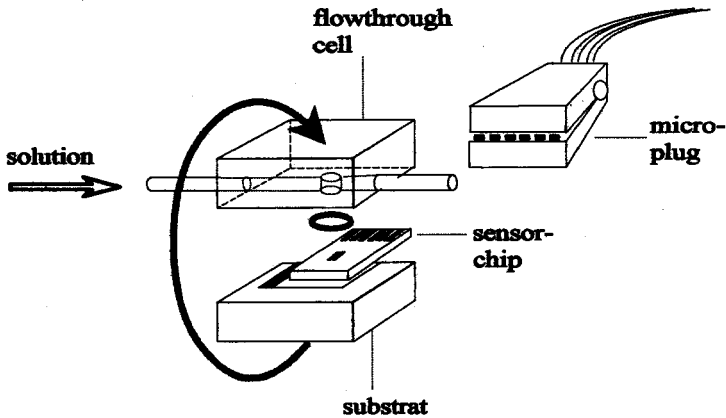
Schematic view of a clip mounted flow-through cell and a sensor flip chip which can be plugged into a microconnector.
